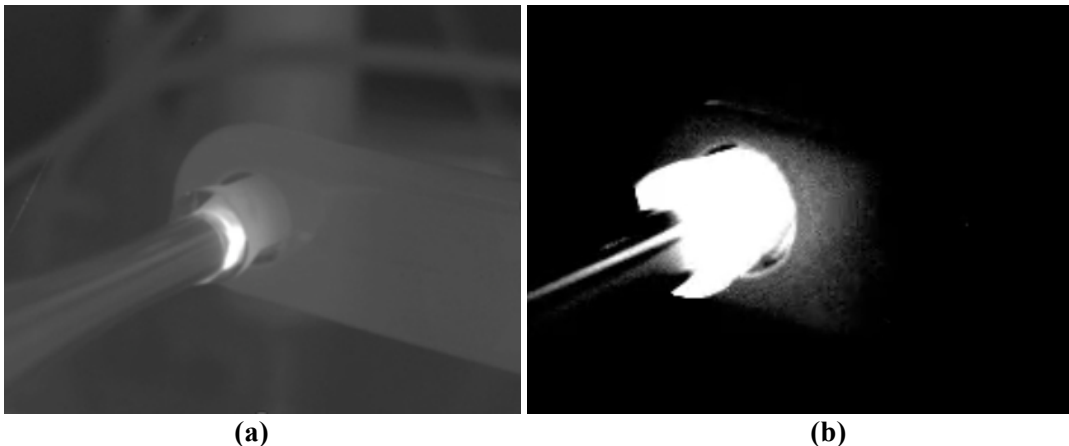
(a) Test showing the steel nub absorbing all the energy from the weld gun. The crank arm had no indication of heat change throughout the entirety of the test. Crank arm C3. (b) Crank arm with defect indicating no energy transfer into the crank arm. Crank arm F9731.
